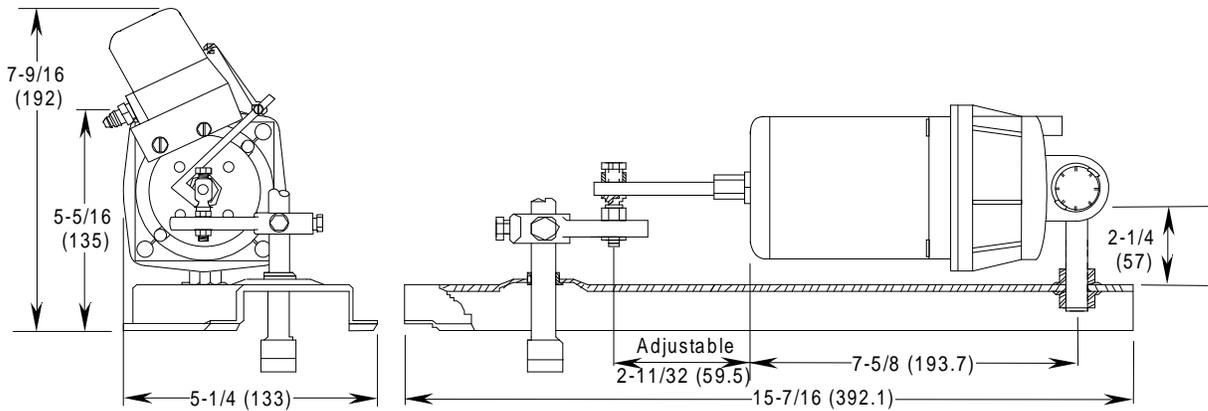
D-4073 with Universal Mounting Bracket and Pilot Positioner, inches (mm)
